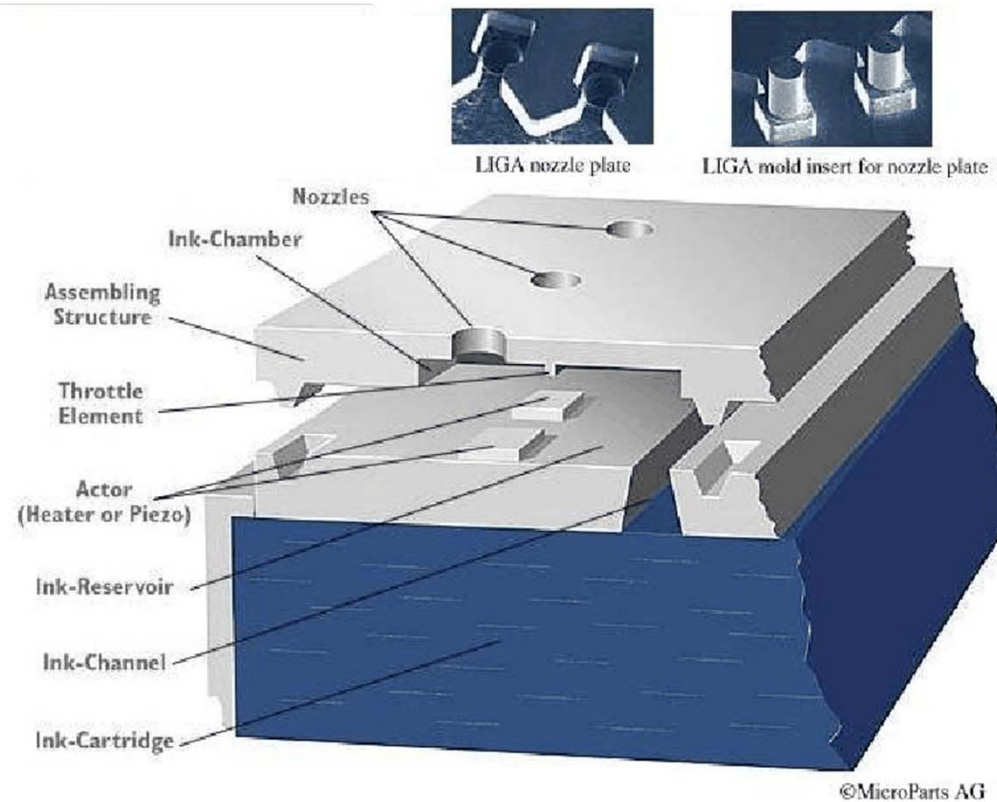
A nozzle plate fabricated by STEAG Microparts AG
